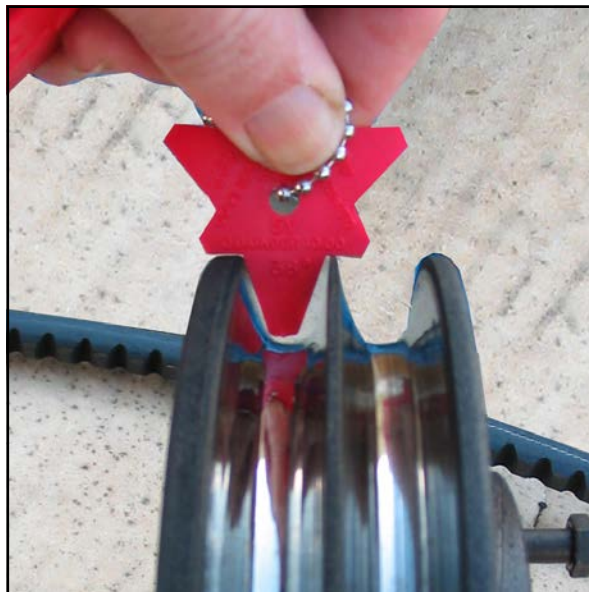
This photo depicts a highly worn sheave, which can cause belt sidewalls to harden and crack, or produce excessive wear on the belt's bottom surface and corners, leading to premature belt failure. In an unworn sheave, the gauge should fit snugly into the groove with no light shining through.
